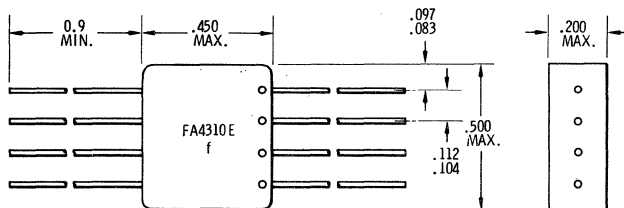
ENCAPSULATED MATCHED PAIR PACKAGE DIMENSIONS.
